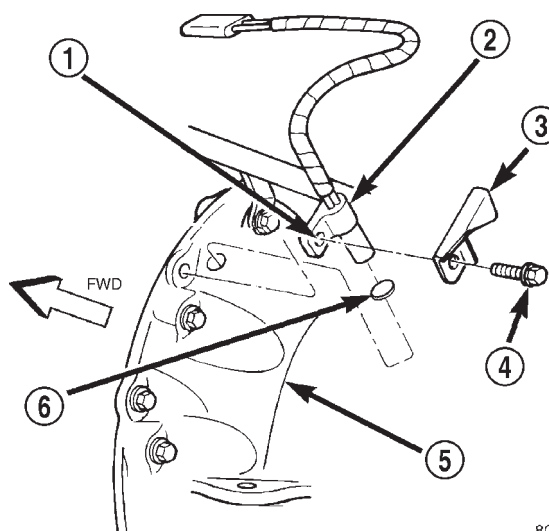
Camshaft Position Sensor—4.7L V-8 Engine
